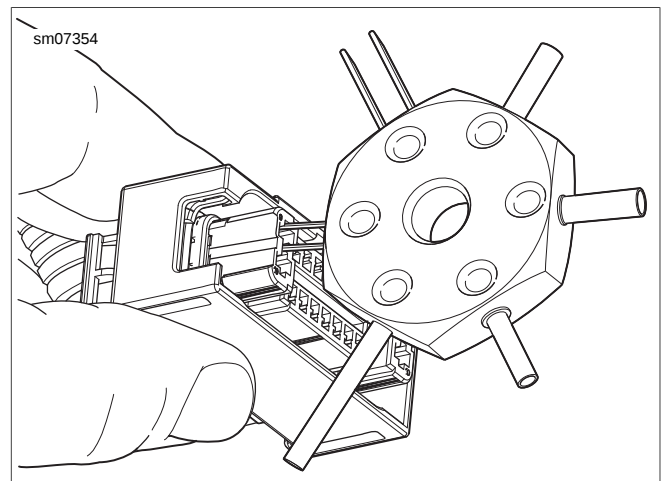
Removing Large Socket Terminals: Tyco MCP Connector
